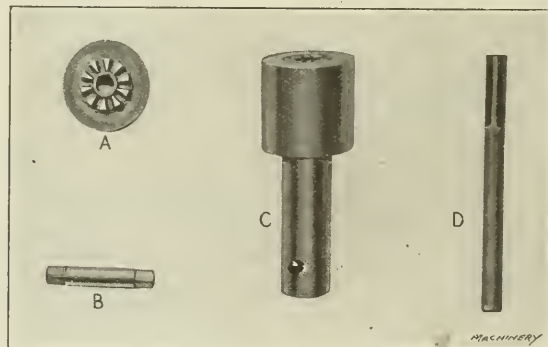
Clutch A, Pivot B, Die C in which Clutch A is pressed, and Swaging Punch D for forming Pentagonal Hole
